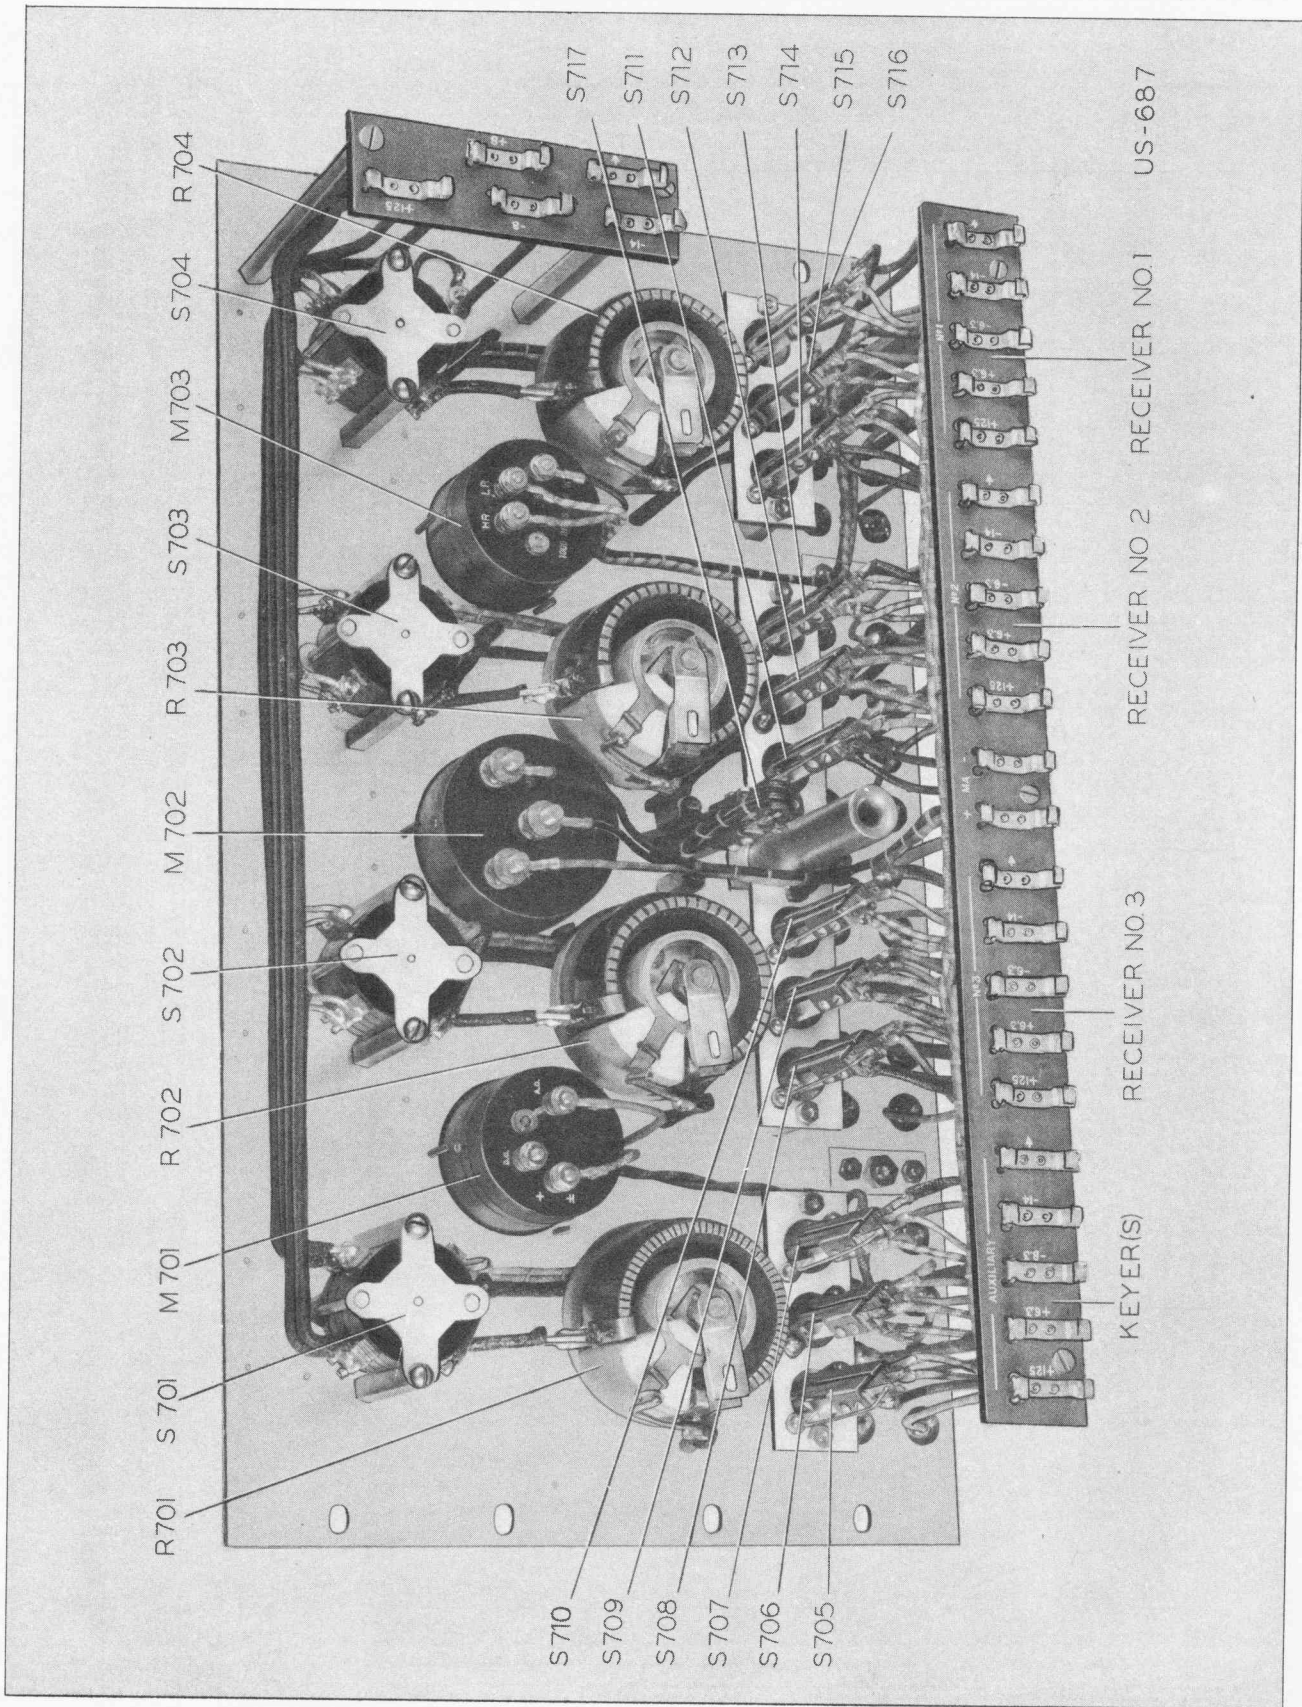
Type CRV-23275 Power Control Panel (Rear View)
